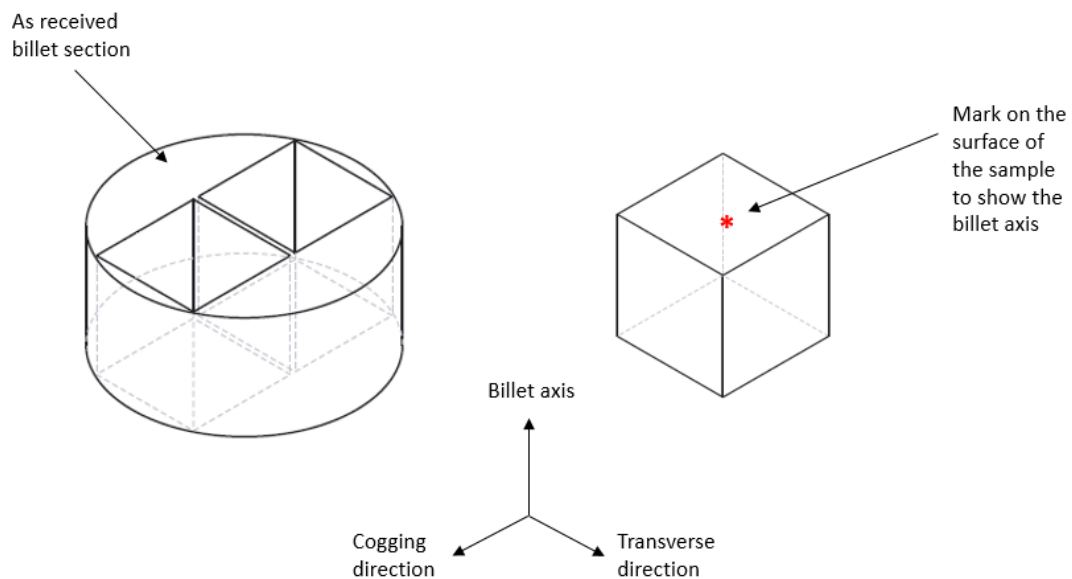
Machining of the cubic samples out of billet sections and marking of the billet axis.
